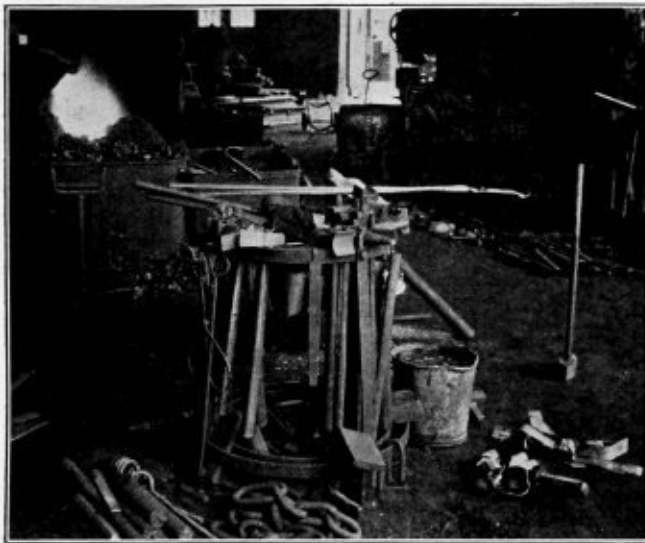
Handy Tool Rack With Sheet Iron Drawer
